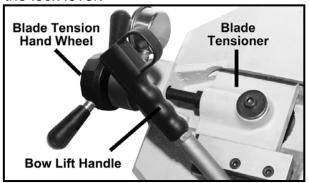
Blade tensioner, blade tension hand wheel and bow lift handle
